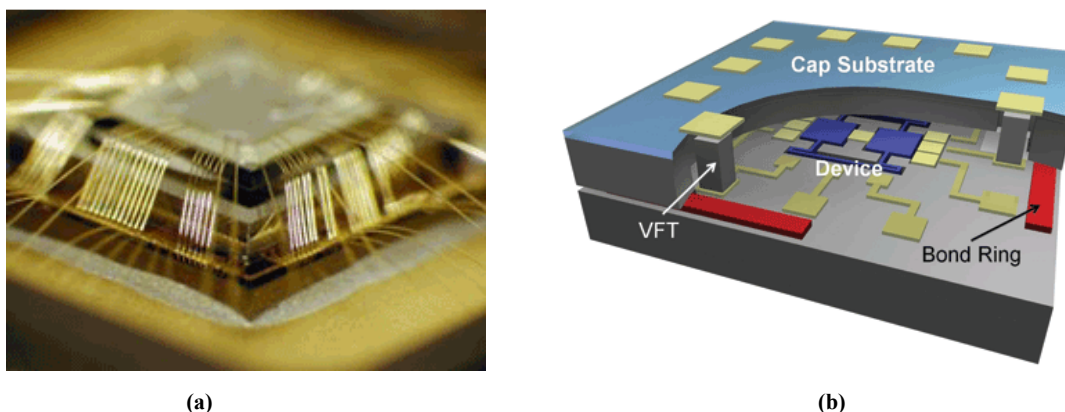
a) Conventional packaging using wire bonding [60]. b) Wafer level packaging using TSV [60]
